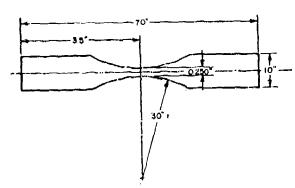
UNNOTCHED SHEET FATIGUE SPECIMEN
